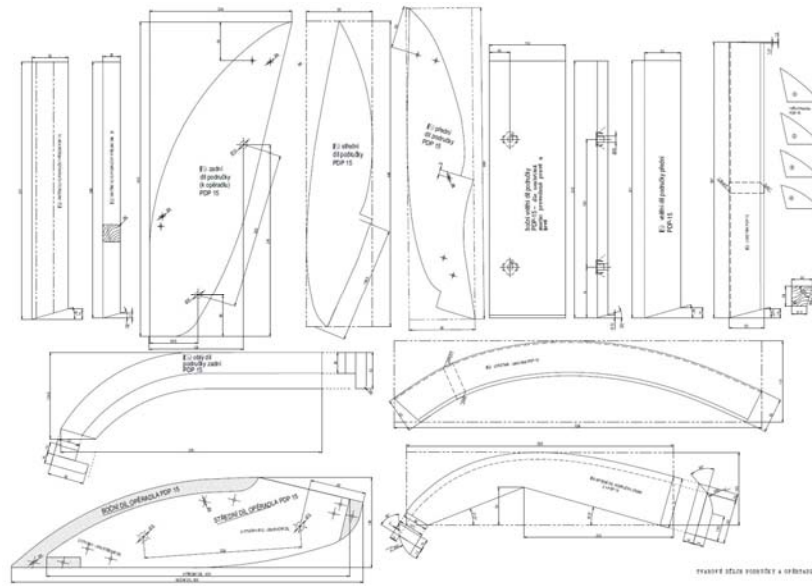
Most of the supporting frame construction parts were made from plywood by CNC machine.
